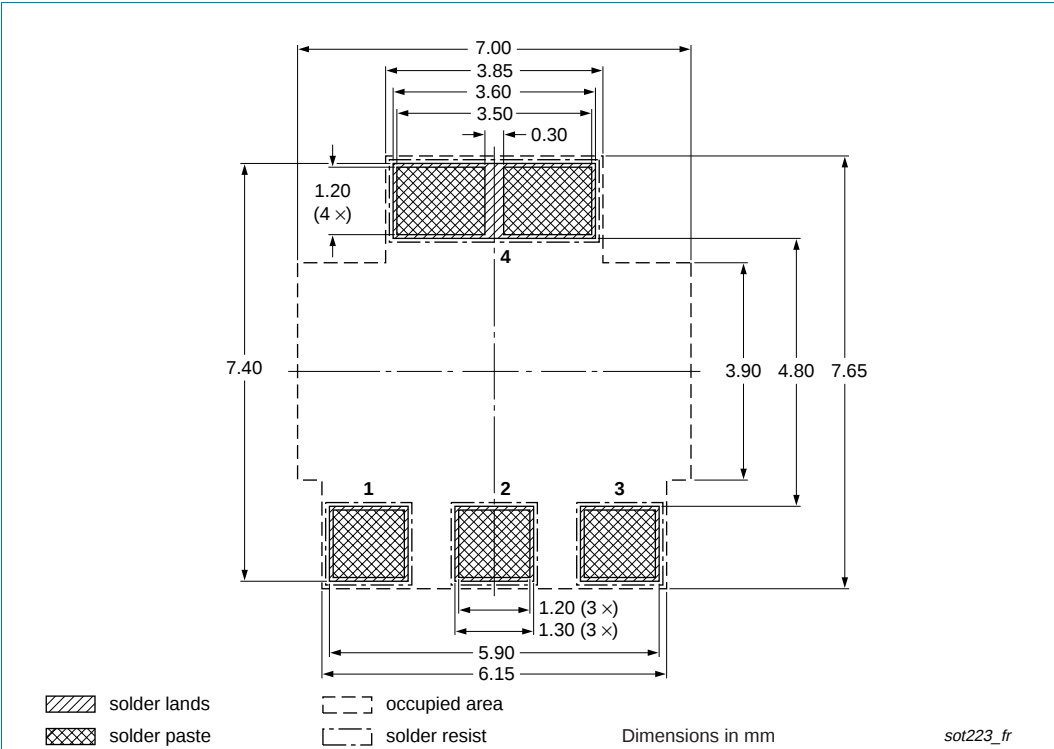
Reflow soldering footprint SOT223 (SC-73)
